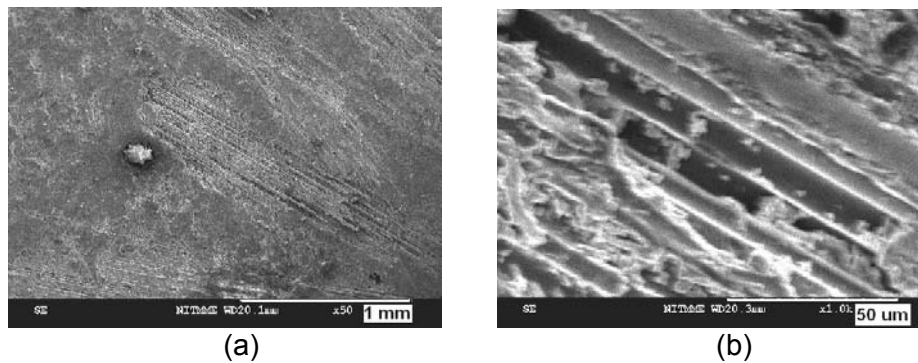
Machined surface of Hand Lay up pipes - worst surface finish.
